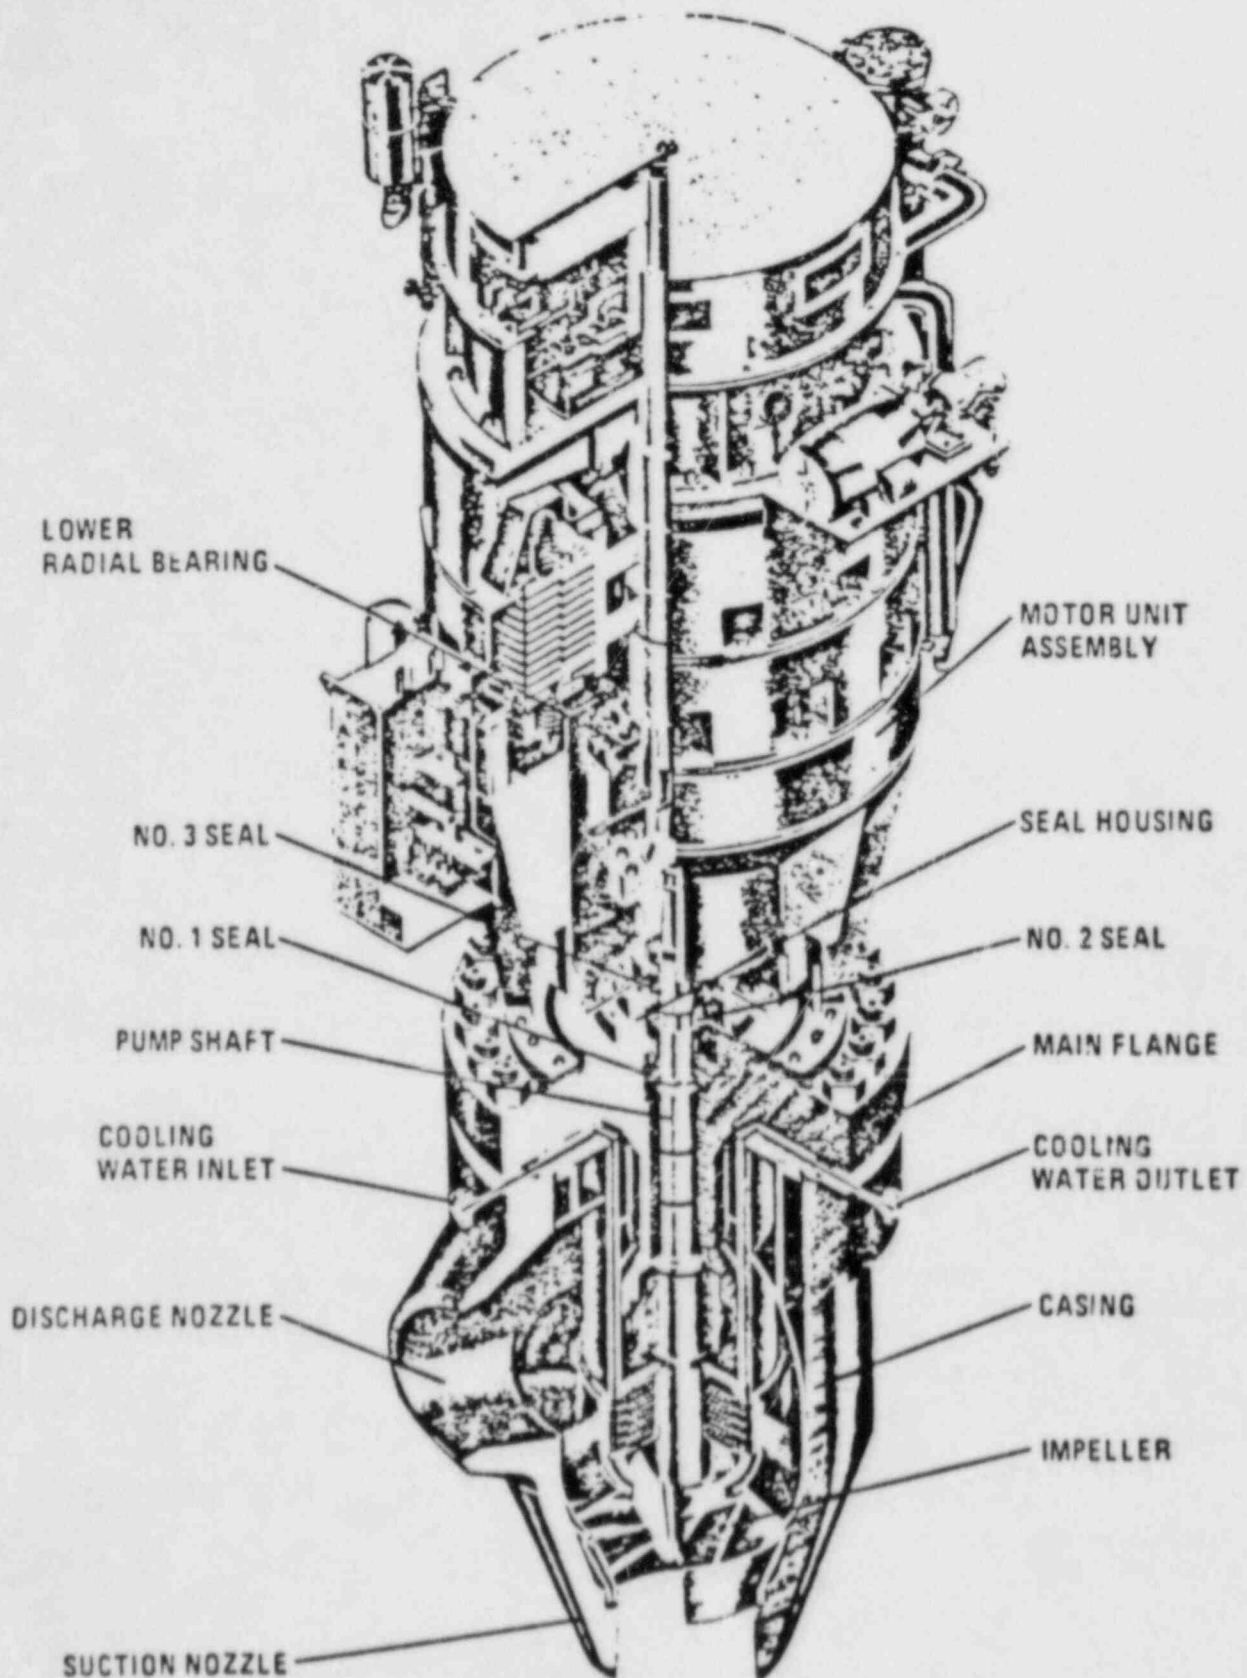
Cutaway of a Typical Reactor Coolant Pump
